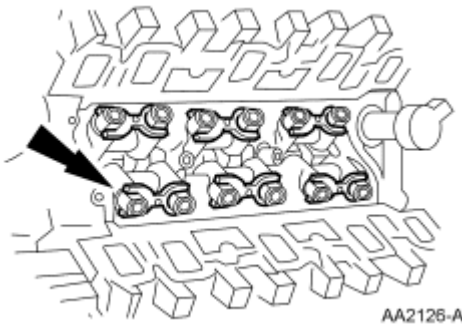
Locating Hydraulic Lash Adjuster Guide Plates
